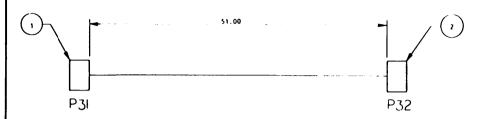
Special Relay Assembly to Control Cubicle Wiring Harness, Drawing No. 72-2248
